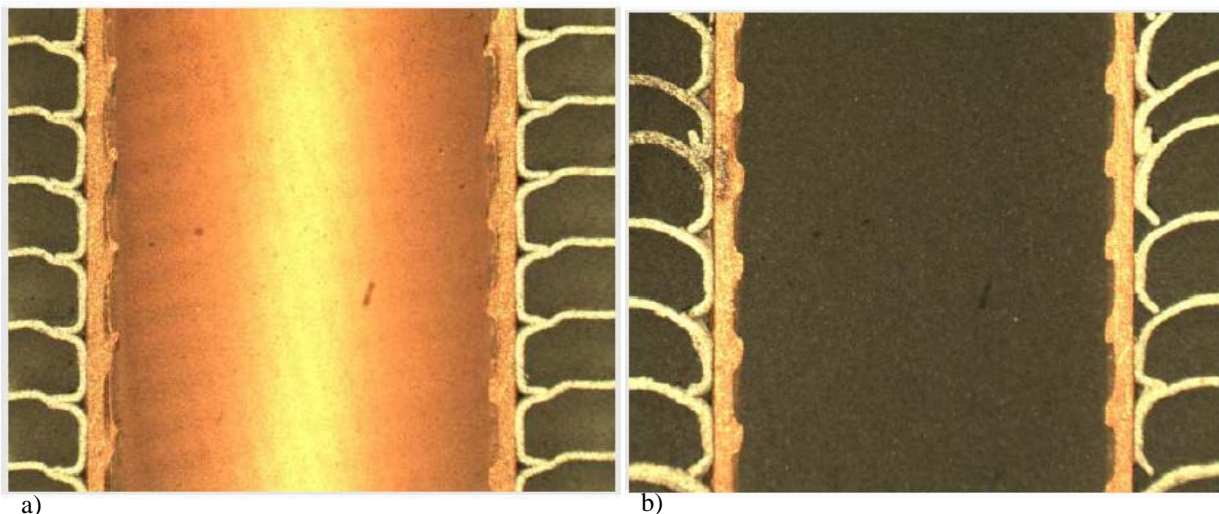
a) Tube-Fin Contact for pressure expanded coil; and b) mechanically (bullet) expanded coil
